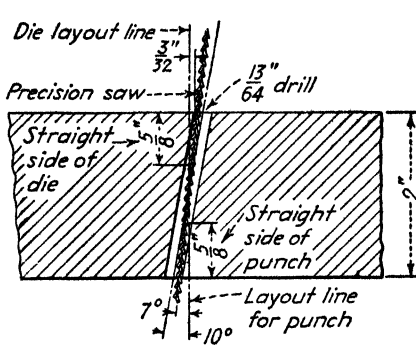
Starting hole and saw angle in cutting out die and punch.
